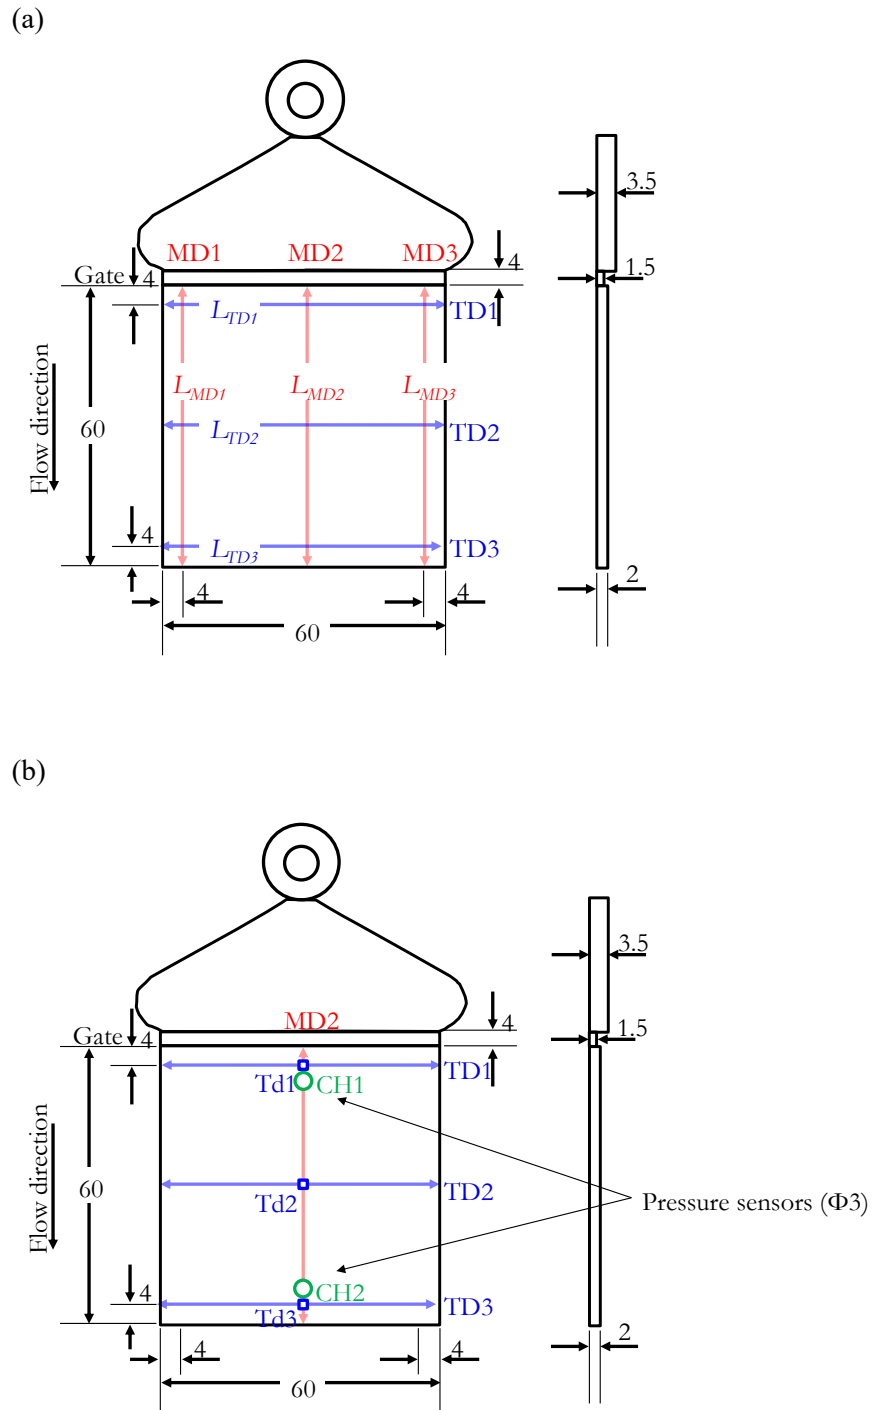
Schematic diagram of the injection-molded specimen
